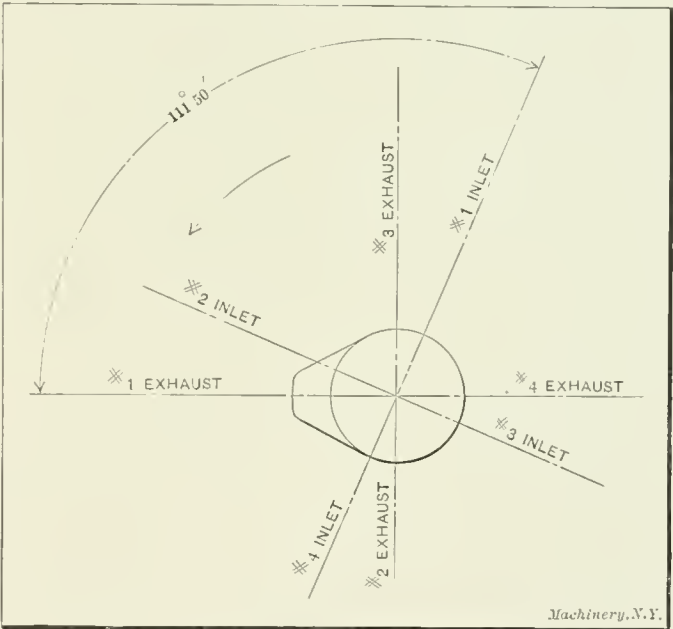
End View of Camshaft showing Relative Positions of Cams
